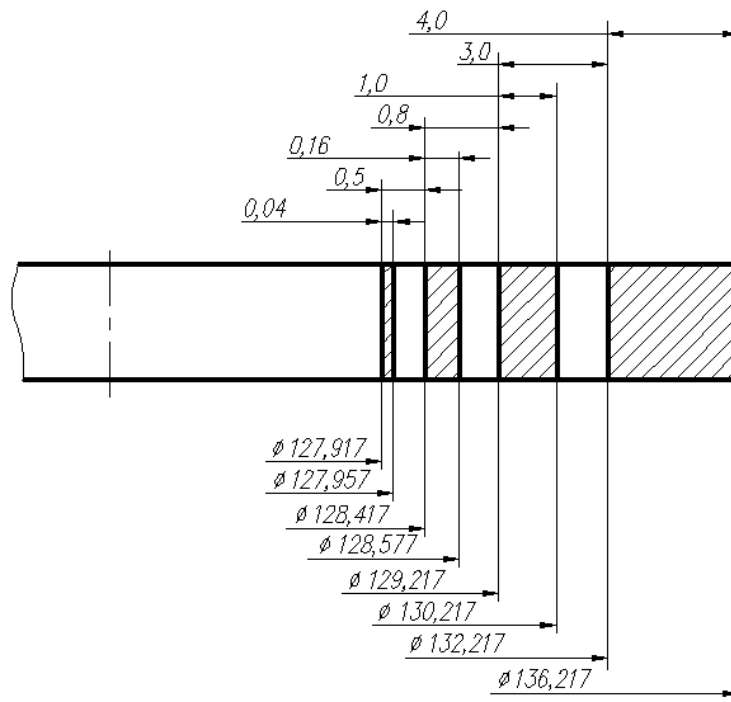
Layout of allowances and tolerances when processing the surface of the head $\varnothing 128f7 \begin{pmatrix} -0,043 \\ -0,083 \end{pmatrix}$.
